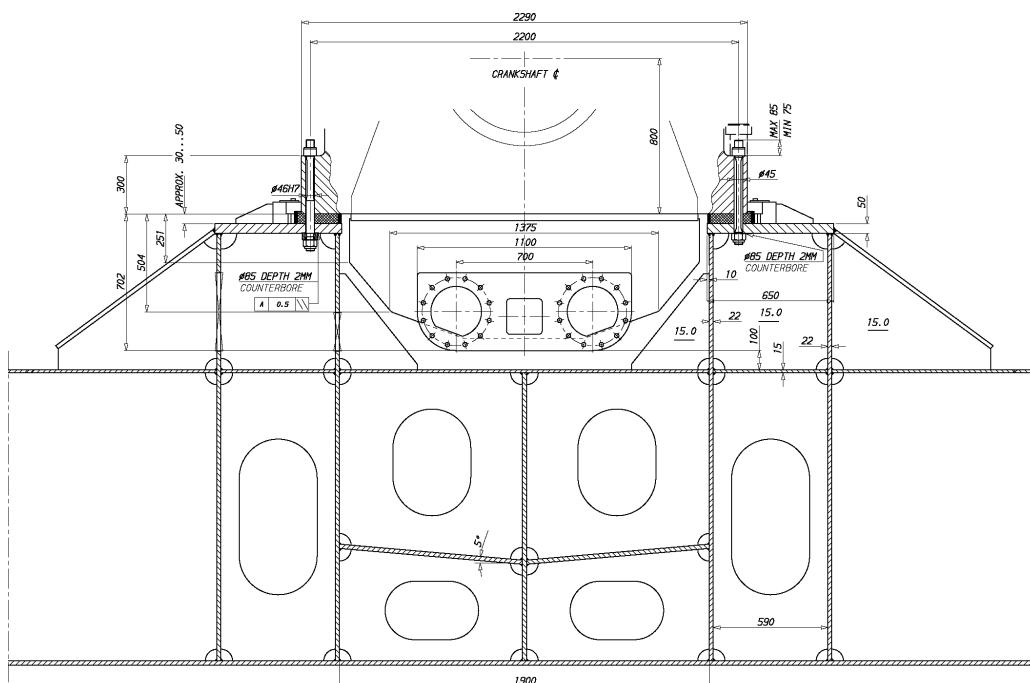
Seating and fastening, rigidly mounted in-line engines on resin chocks (1V69L0082c)
